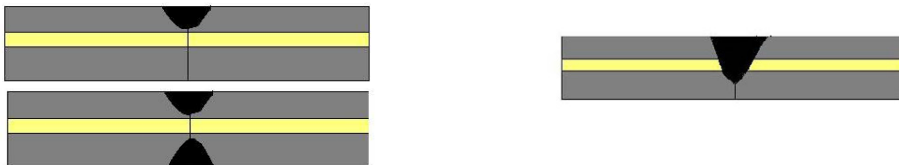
Laser welding of sandwich materials (a) two side approach, (b) one side approach
